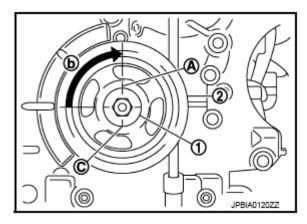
Tightening Crankshaft Pulley Bolt Courtesy of NISSAN NORTH AMERICA, INC.
